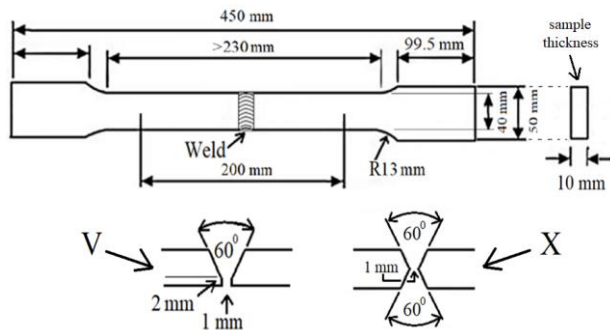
Tensile test dimensions according to ASTM E8/E8M-22 [26]
